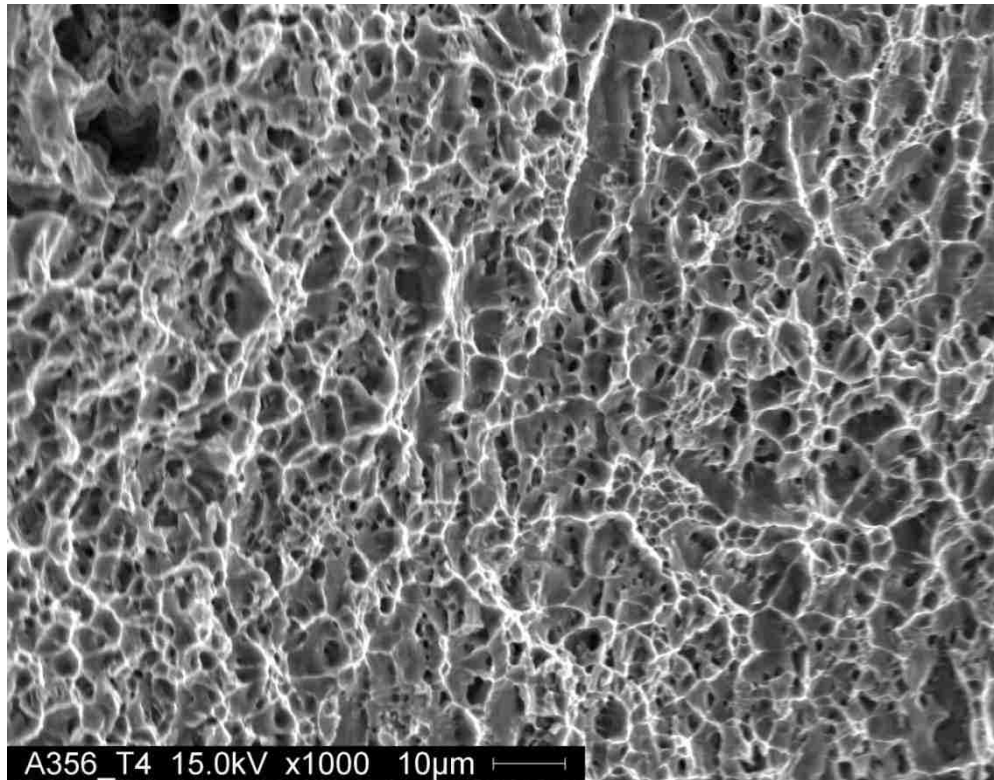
Fractograph of the tensile specimen of welded T4 cast alloy A356.
